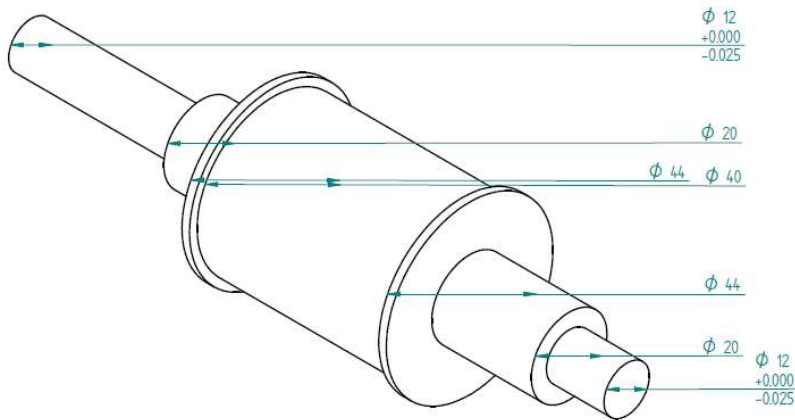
Solid steel rotor shaft and back-iron drawing.
